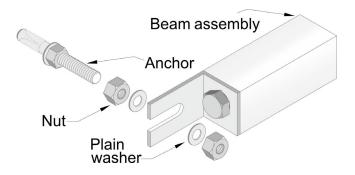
Installation of an individual EAN-91M-B sensor on the wall
